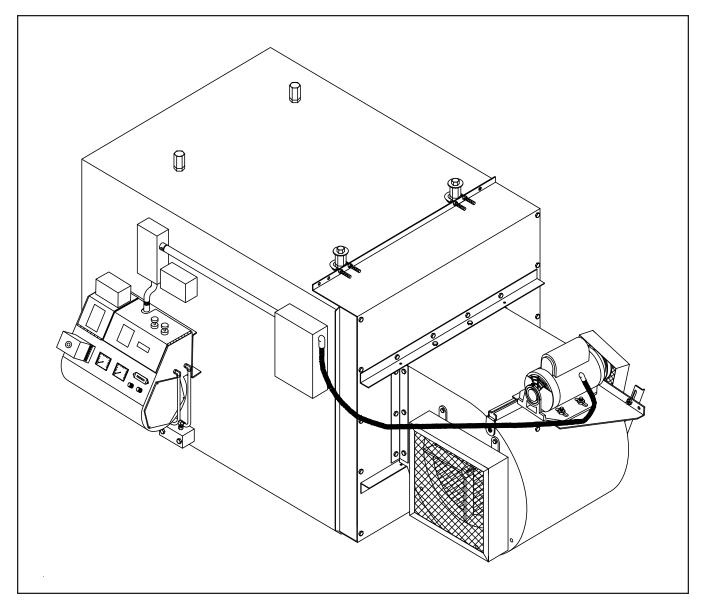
C - Three-dimensional View - Central Furnace Completely Assembled
